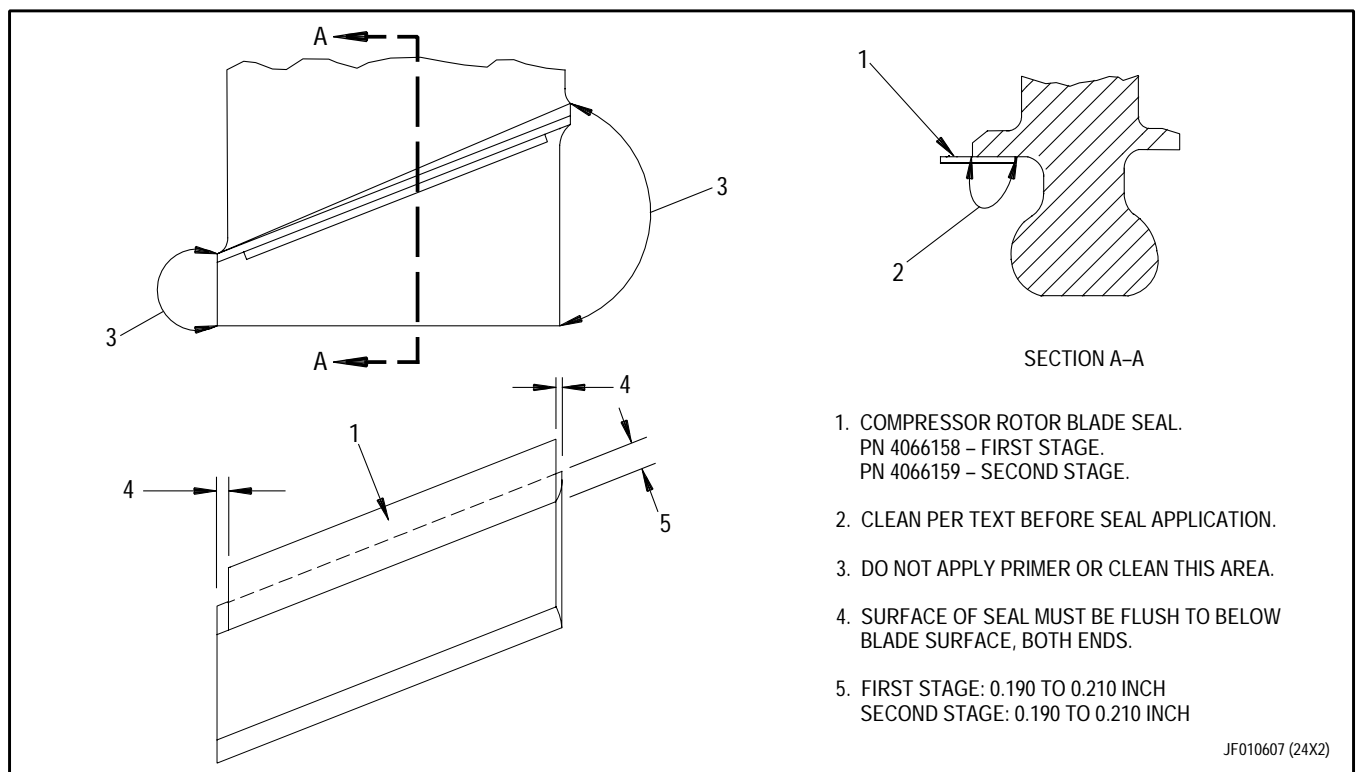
Front Compressor Rotor Blades - Seal Replacement
